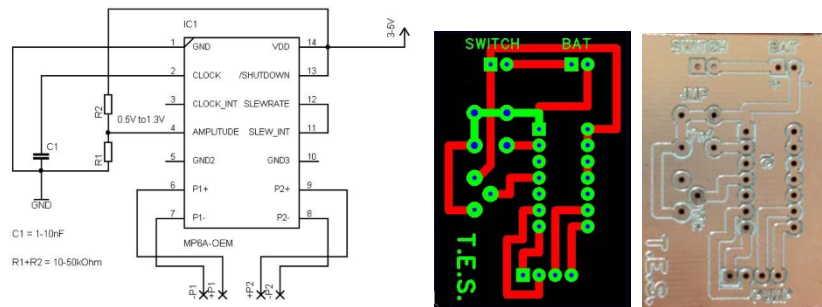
OEM Board with amplitude and frequency set and external components; PCB layout and milled PCB
